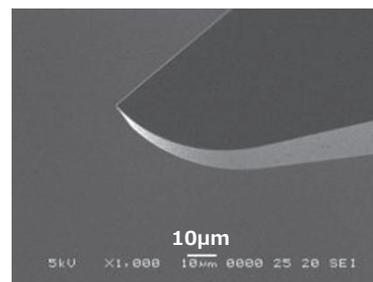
Cutting Edge of R30 μm Nano-Ball End Mill
